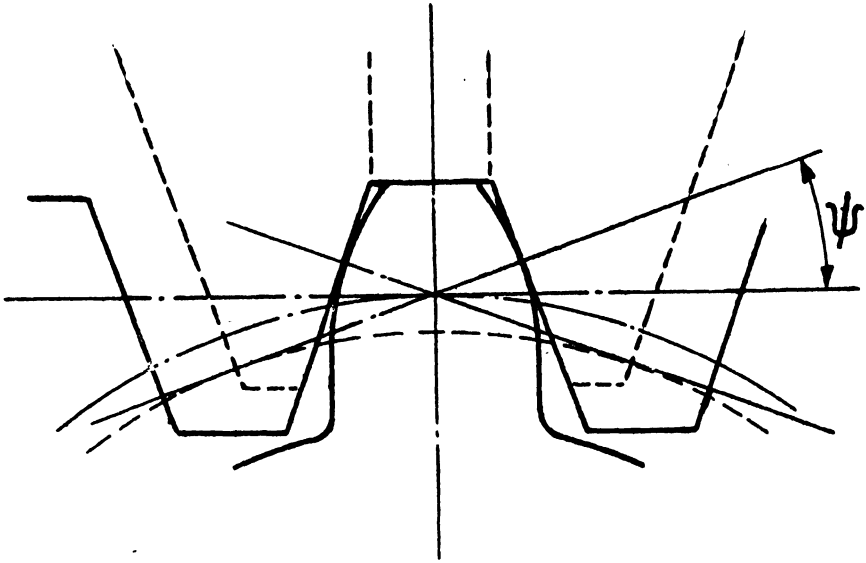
PRINCIPLE OF SYKES GEAR-TOOTH CALIPER
